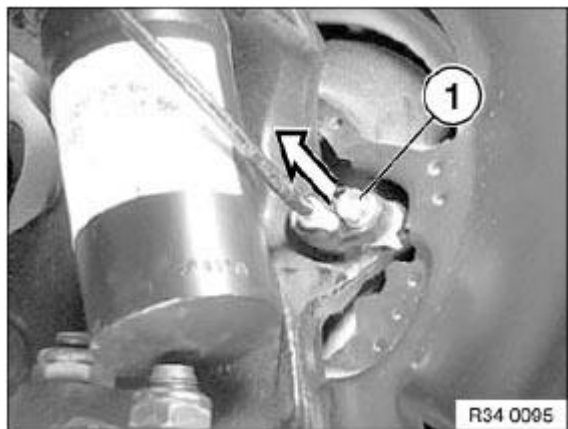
Identifying Hexagon Socket Head Cap Screw
